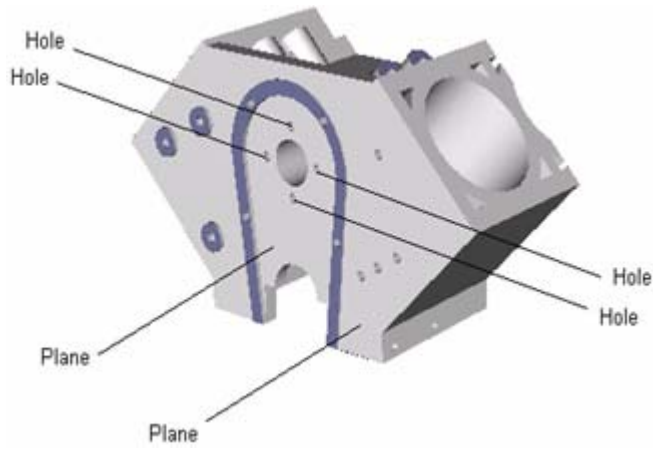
The Surface Of The Outer Face Of The Engine Block
